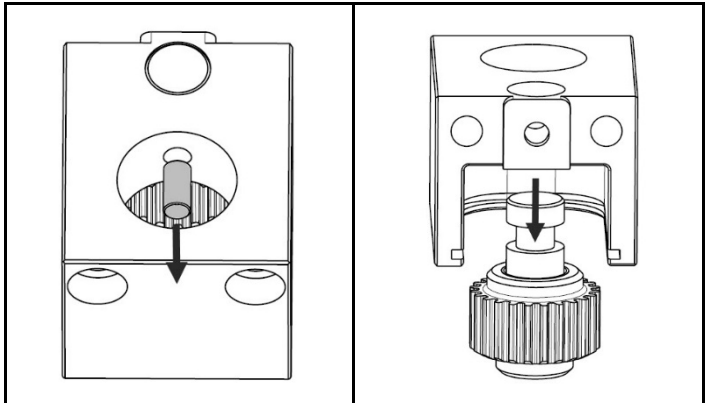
Remove securing Dowel Pin followed by Intermediate Gear Assembly
